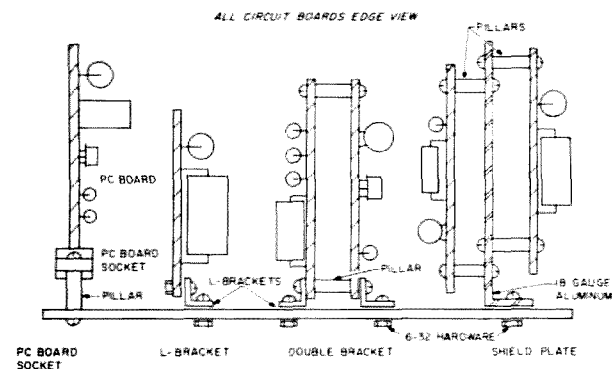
Four methods of mounting circuit boards: PC-board sockets, L-brackets, double brackets, and shield plate.
